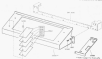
MECHANICAL DESIGN OF A MECHANICAL ASSEMBLY
